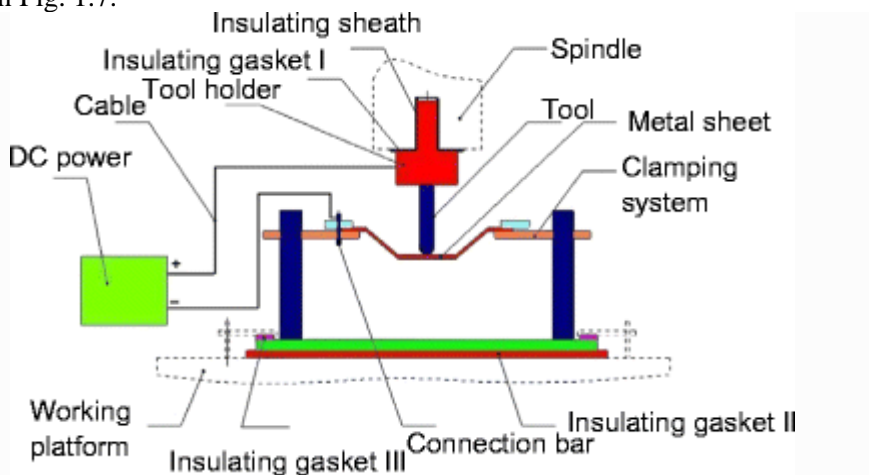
Schematic view of the electric hot incremental sheet forming process [11]
